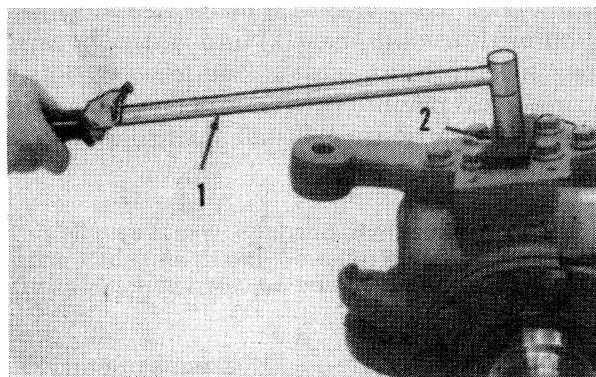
A—Use a spanner bar (2) with a nut welded in the center and a torque wrench (1) to measure torque required to rotate steering knuckle.
